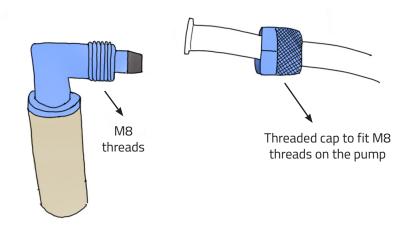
The hose attaching to the pump also has a cap with internal threads which is coloured blue
